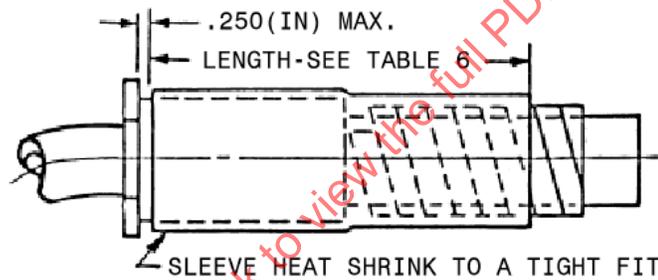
ABRASION SLEEVE ATTACHMENT /7/ /8/
